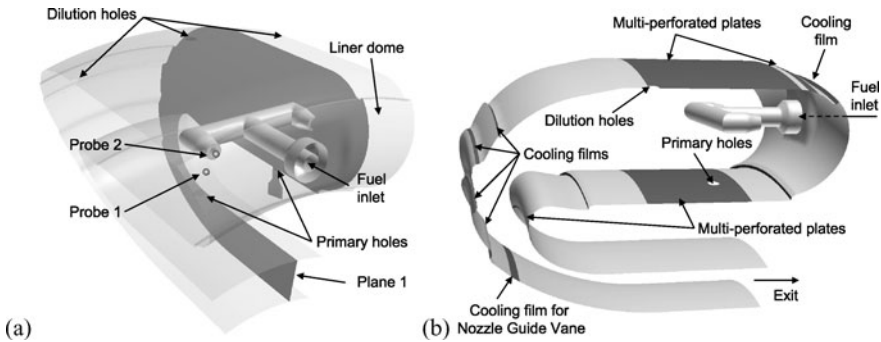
Combustion chamber: (a) 3D view and (b) side view.
